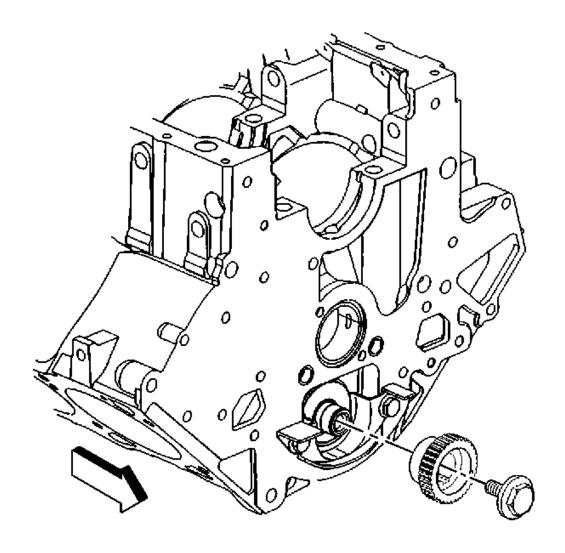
Locating Balance Shaft Driven Gear & Bolt Courtesy of GENERAL MOTORS CORP.
